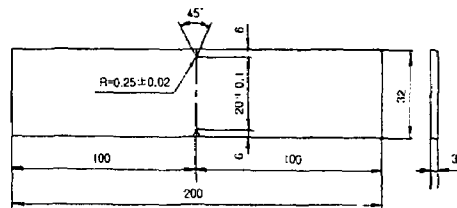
Dimension of tensile specimen (KS B 0801 14 B호)
